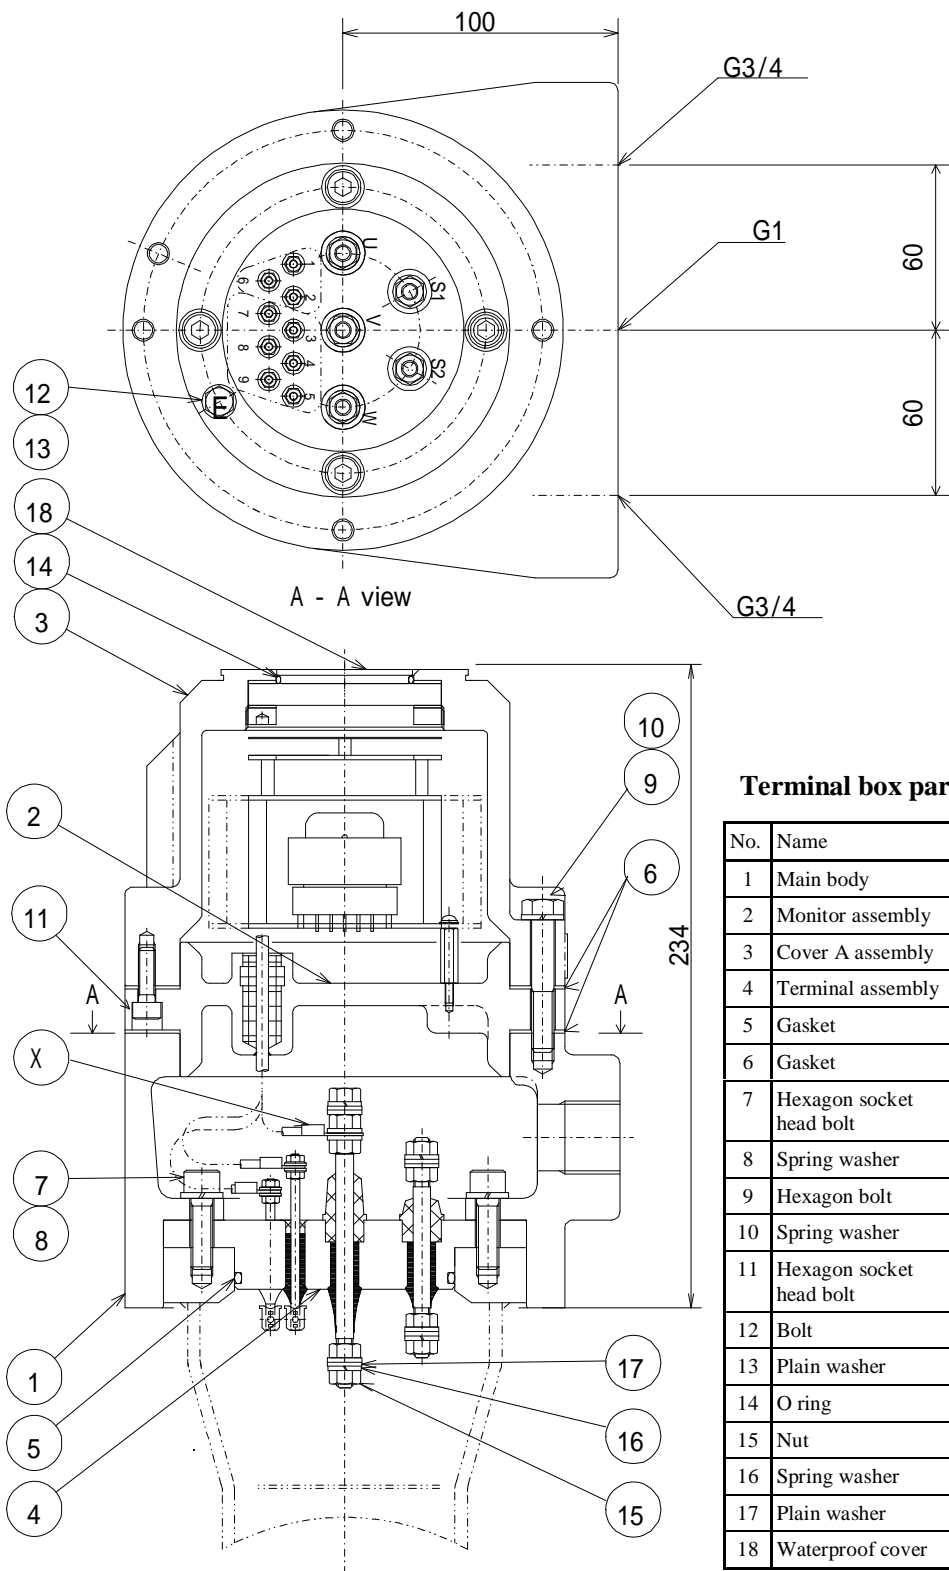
Flameproof Type of Explosion-protection Terminal Box
